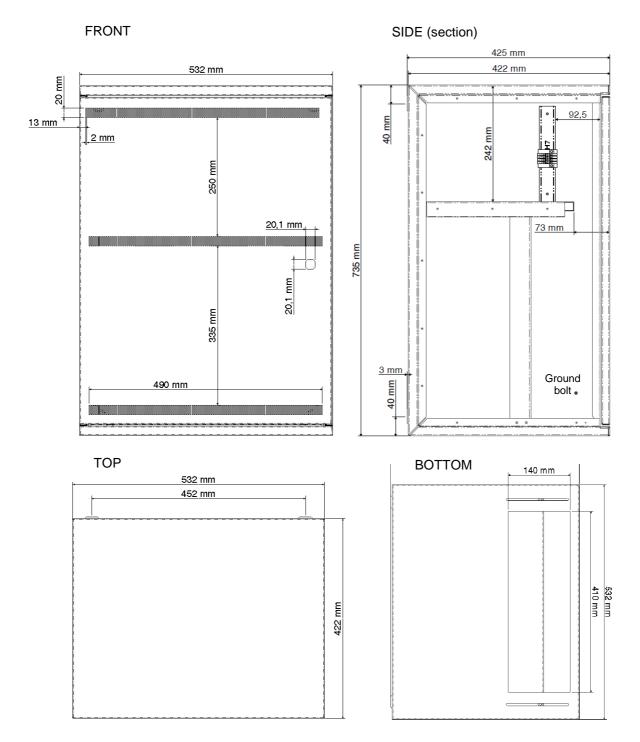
Front, Side, Top and Bottom views of the indoor WM-UP8/UP16 Cabinet container
